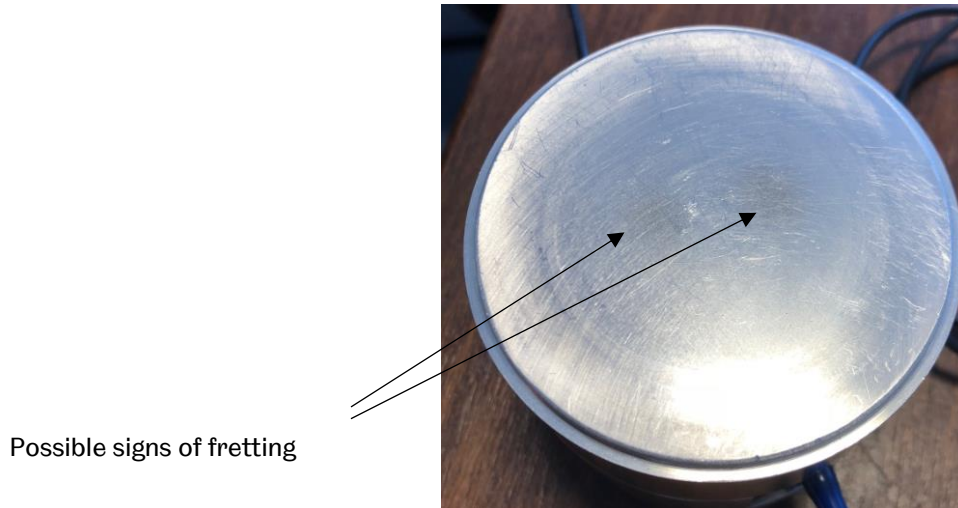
Possible signs of fretting on the contacting surface of test specimen S1.
